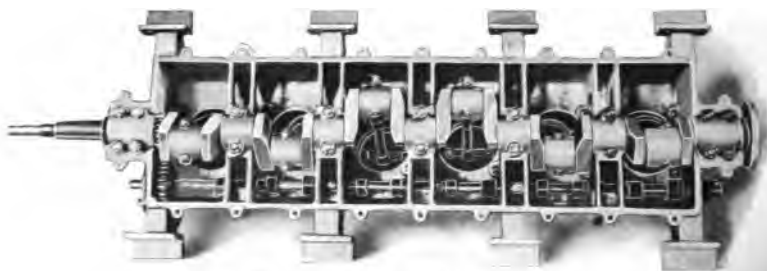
SIX-CYLINDER CRANK SHAFT.
